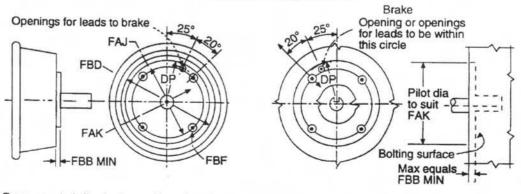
Face-mounted disc brake configuration. Refer to Table 3 to determine actual dimensions for the applicable motor frame designation
